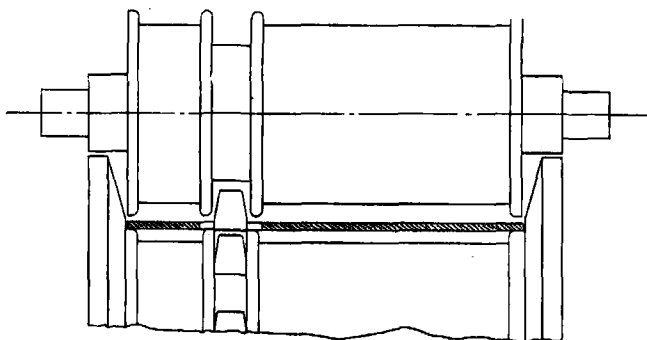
Flanged sprocket and guide roller as used in the projector, with film in cross section. This drawing is to a scale of $6.52\times$.
